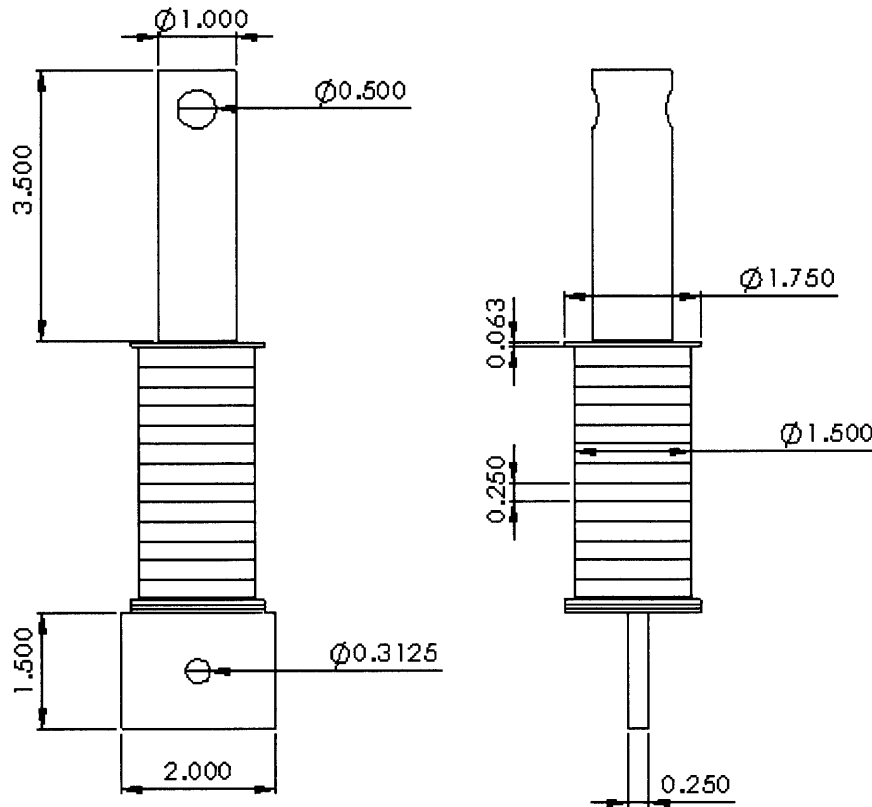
Dimensions of Spring Mount and Spring. The dimensions shown are in inches.
